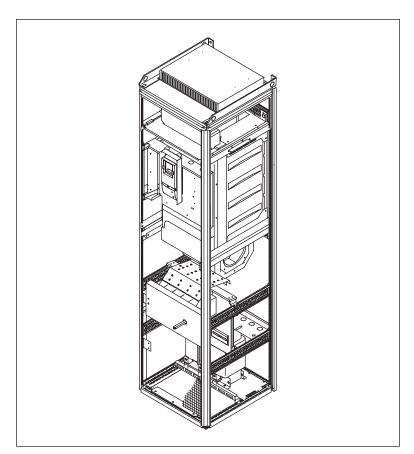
FR10 – FR12 Control Unit Mounted on a Hinged Assembly Box (Optional)
